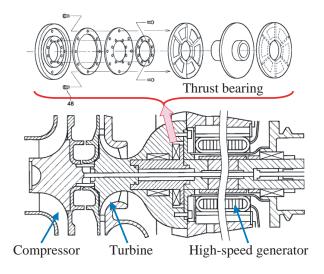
Self-acting air lubricated thrust bearing with a sheet spring.
